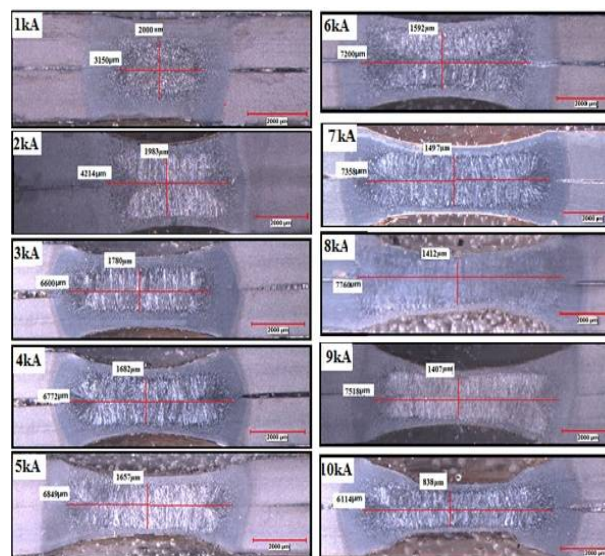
The macrostructure of welded sample which joined with different welding current.
